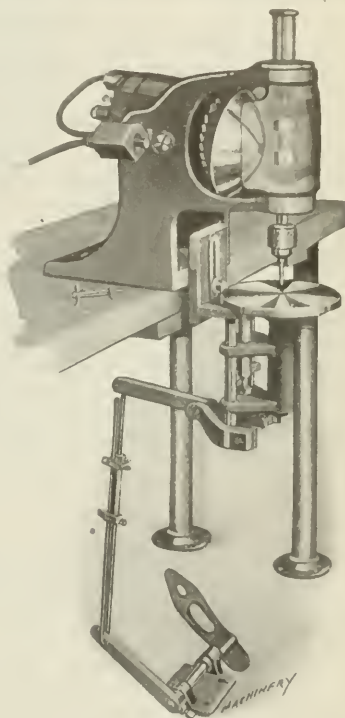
View of Anderson Tapping Machine, showing Treadle and Springs to take up Inequality of Foot Pressure and counterbalance Weight
